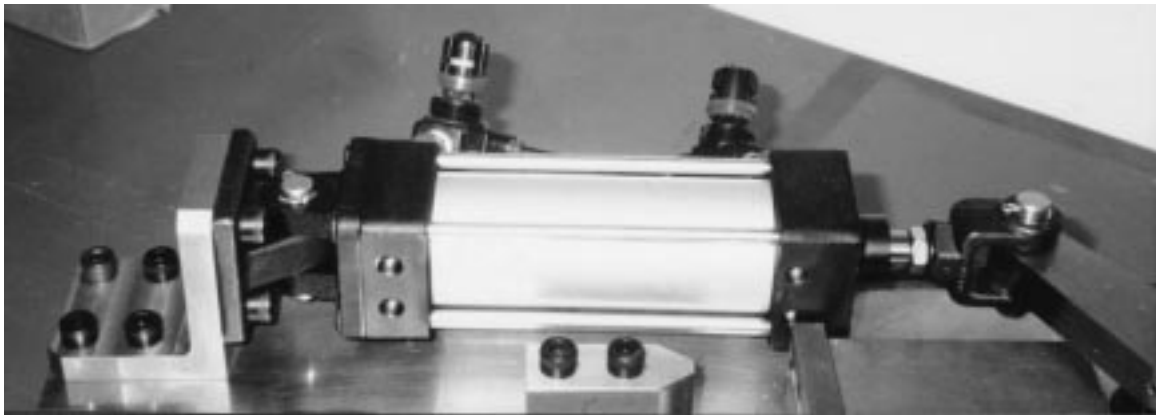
Large pneumatic cylinder for deformation of the outer ring during bearing assembly. Knobs along top are flow regulators to control cylinder aggressiveness.
